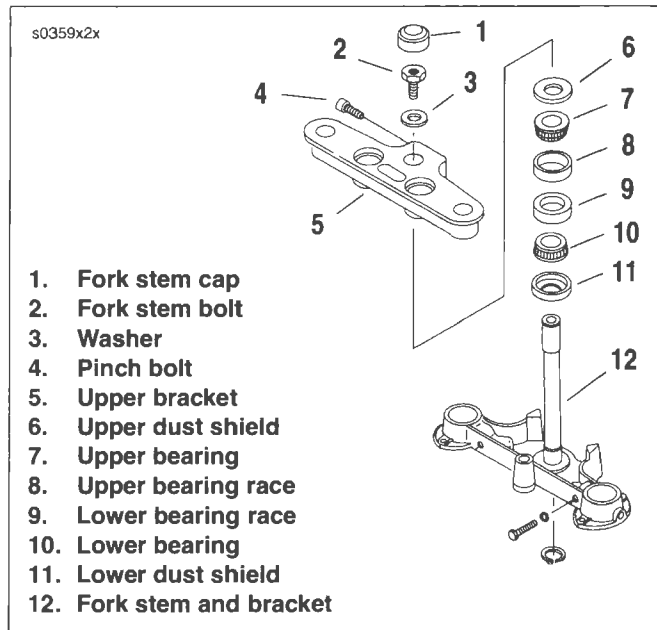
Steering Head: FLSTC, FLSTF, FLSTN
